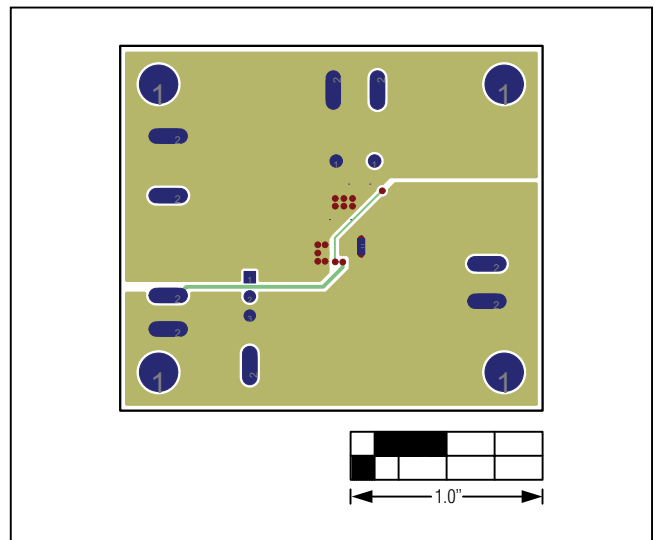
MAX17501B/MAX17501F EV Kits PCB Layout—Solder Side
